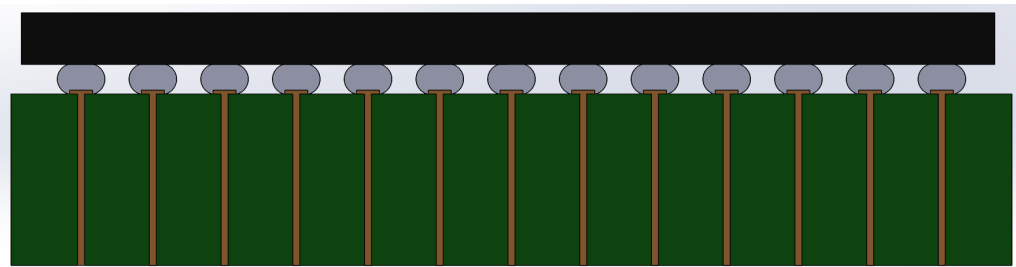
Cross-Sectional Layout Diagram of BGA Assembly
